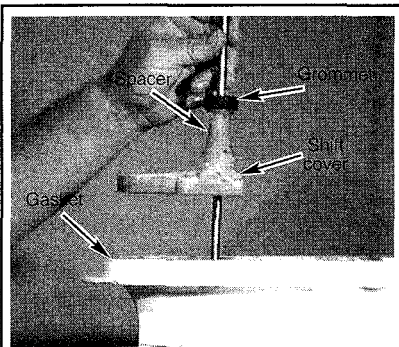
Carefully lower the cover and shift rod into the gearcase
